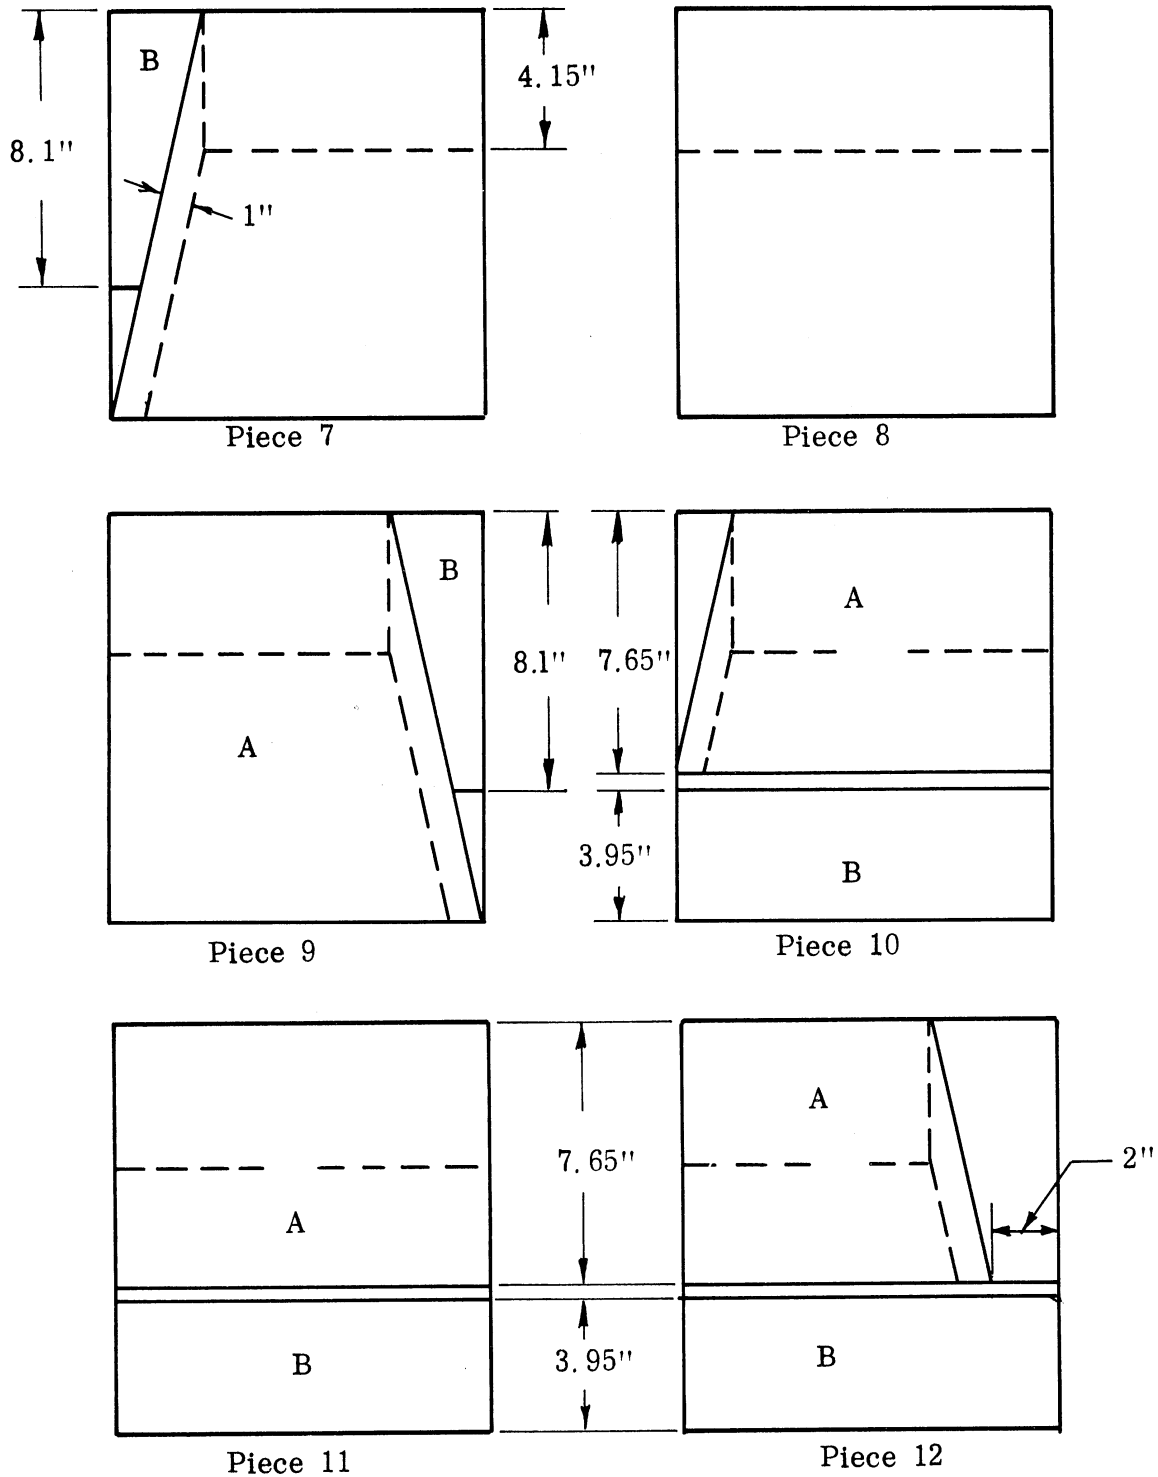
B: CUTTING OF 1" x 12" x 12" DIELECTRIC PIECES
